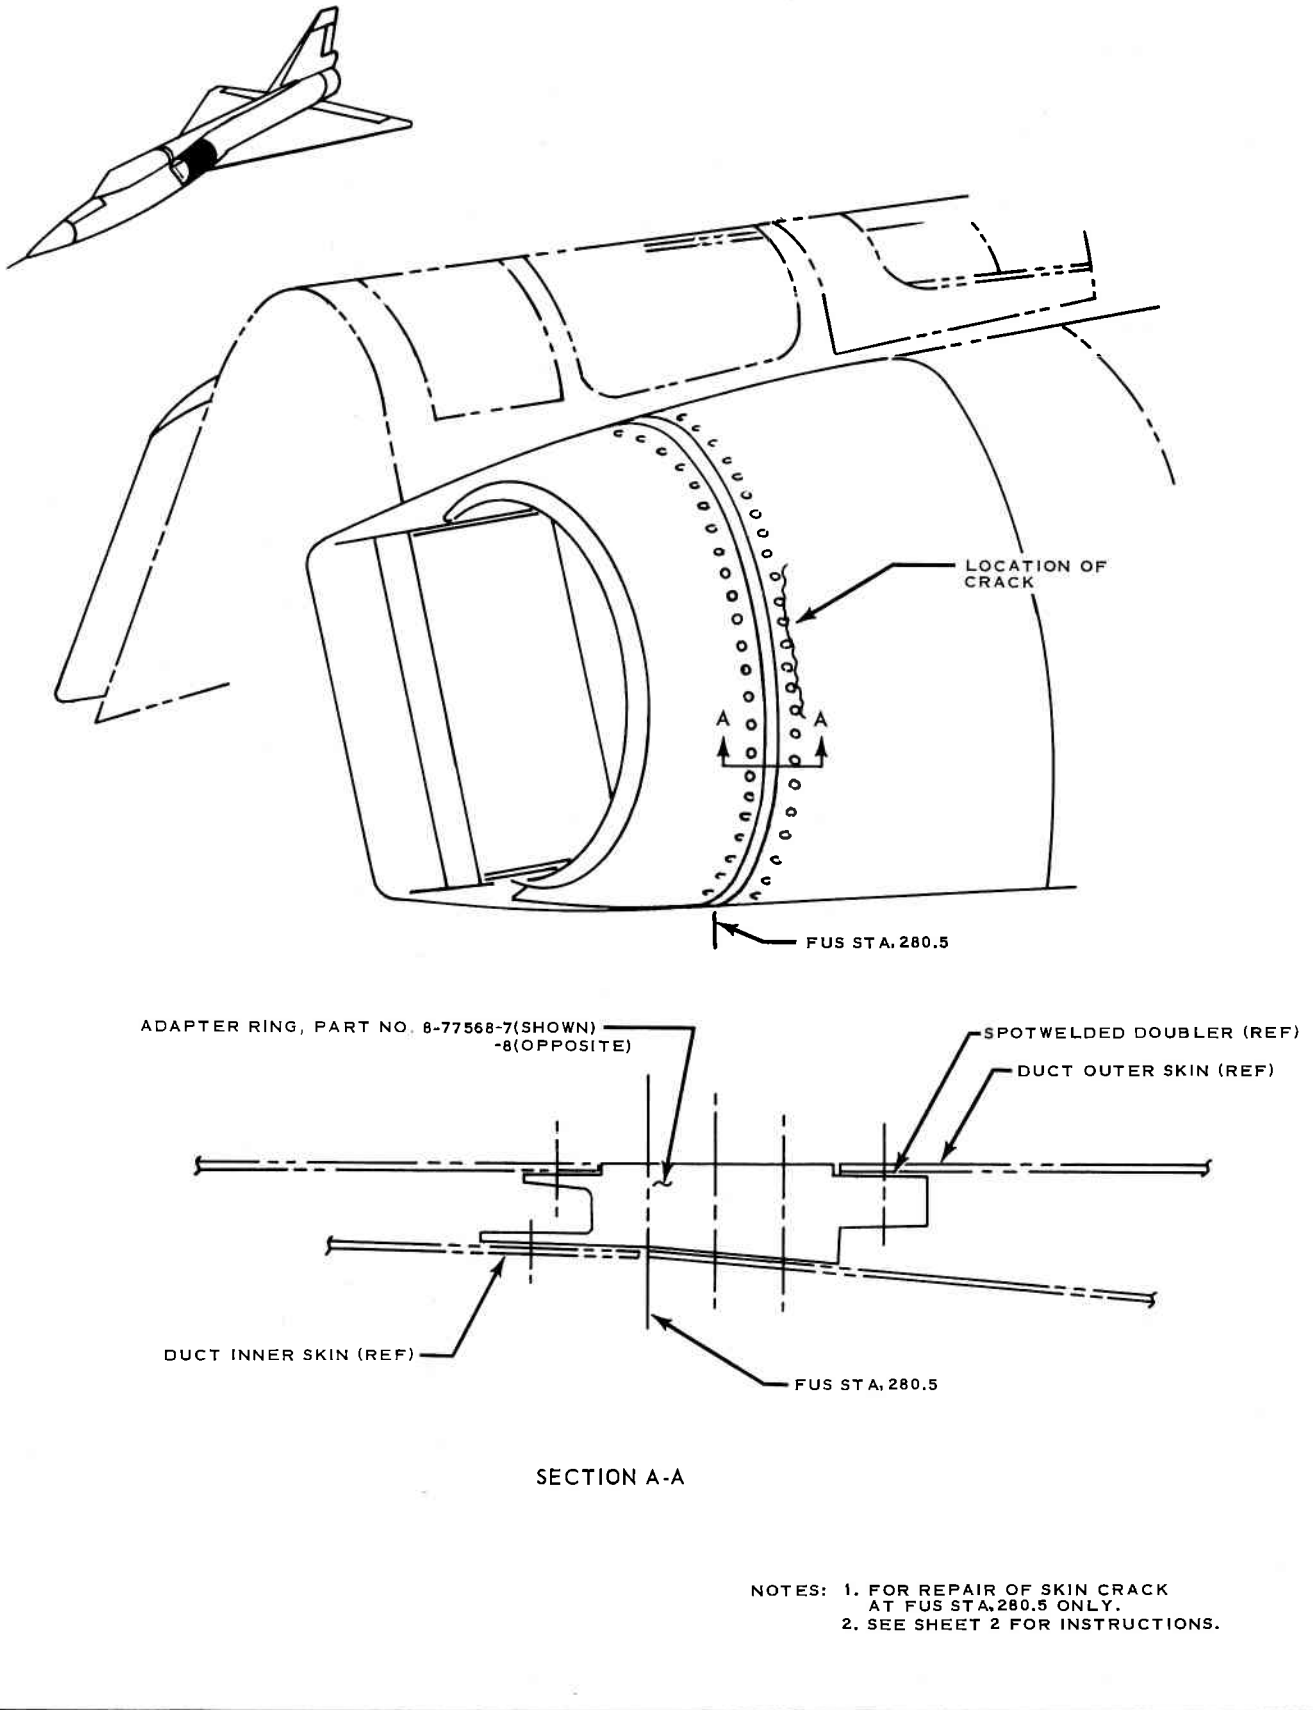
D. Air Intake Duct, Skin Crack - Typical Repair (Sheet 1 of 3)
